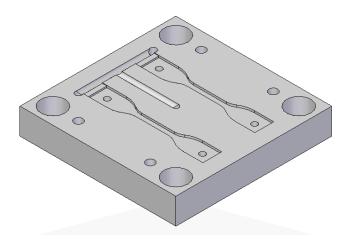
3D drawing of the test specimen mould (Vihtonen 2011)
